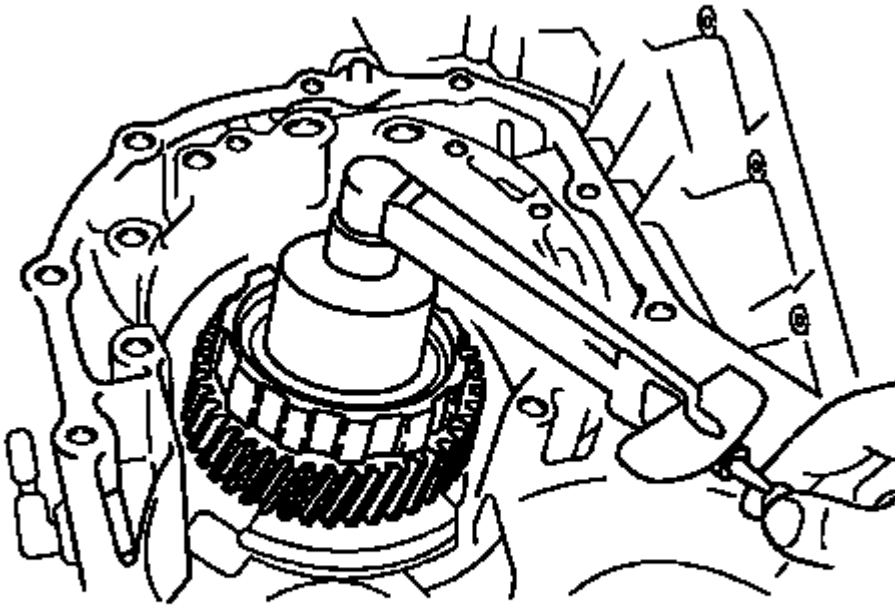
Turning The Counter Drive Gear Using A Wrench
